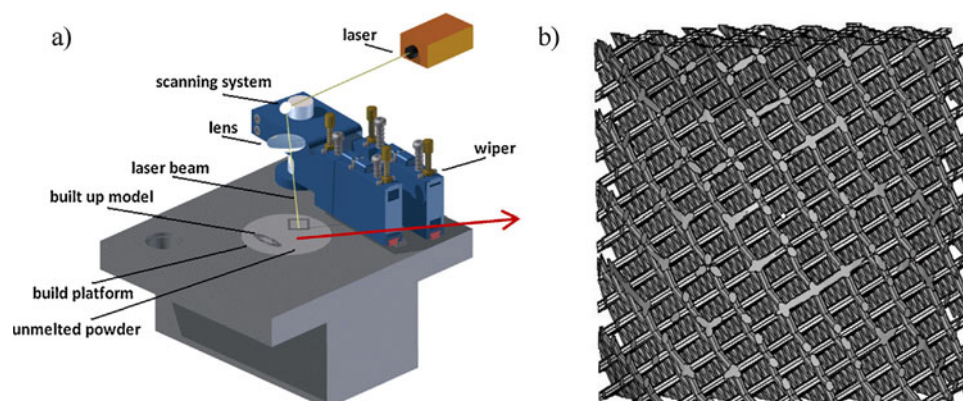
(a) Layout of the SLM equipment [6]. (b) CAD model of a sample.
